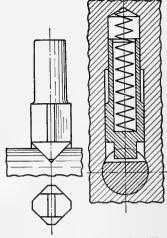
The plunger is milled square with round corners and the hole is partly broached; this does away with the necessity of a key. The point is flat milled.
